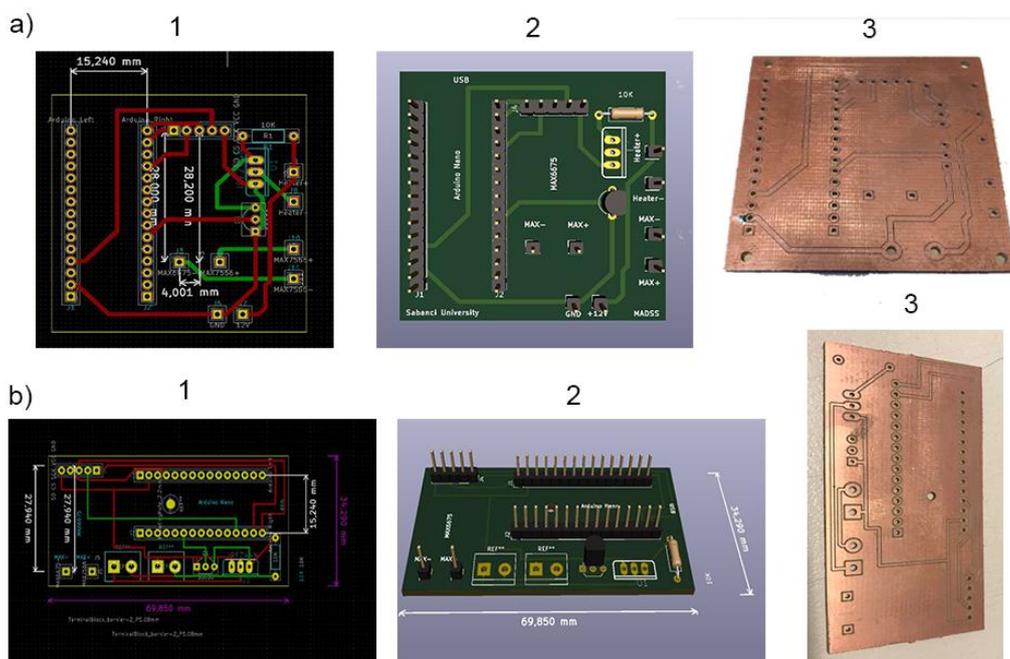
a) PCB printing for GMO analysis b) PCB printing for *E. coli* analysis
